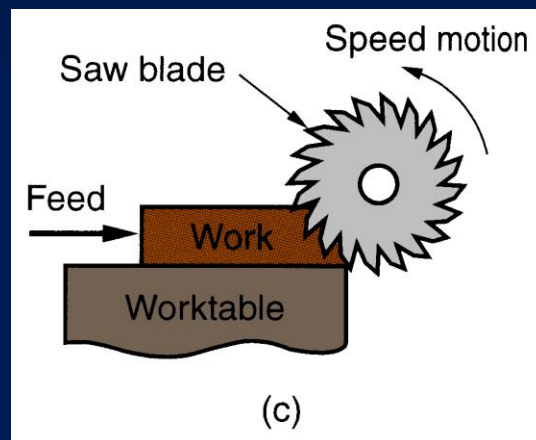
(c) circular saw – rotating saw blade provides continuous motion of tool past workpart
